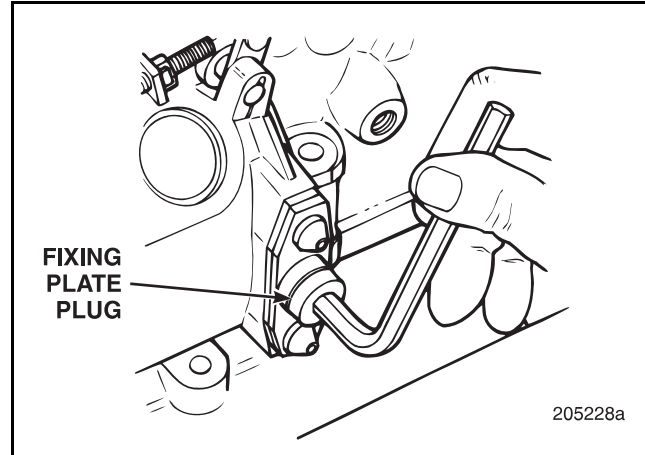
P7100 Injection Pump/Mechanical Governor Pre-Lubrication
